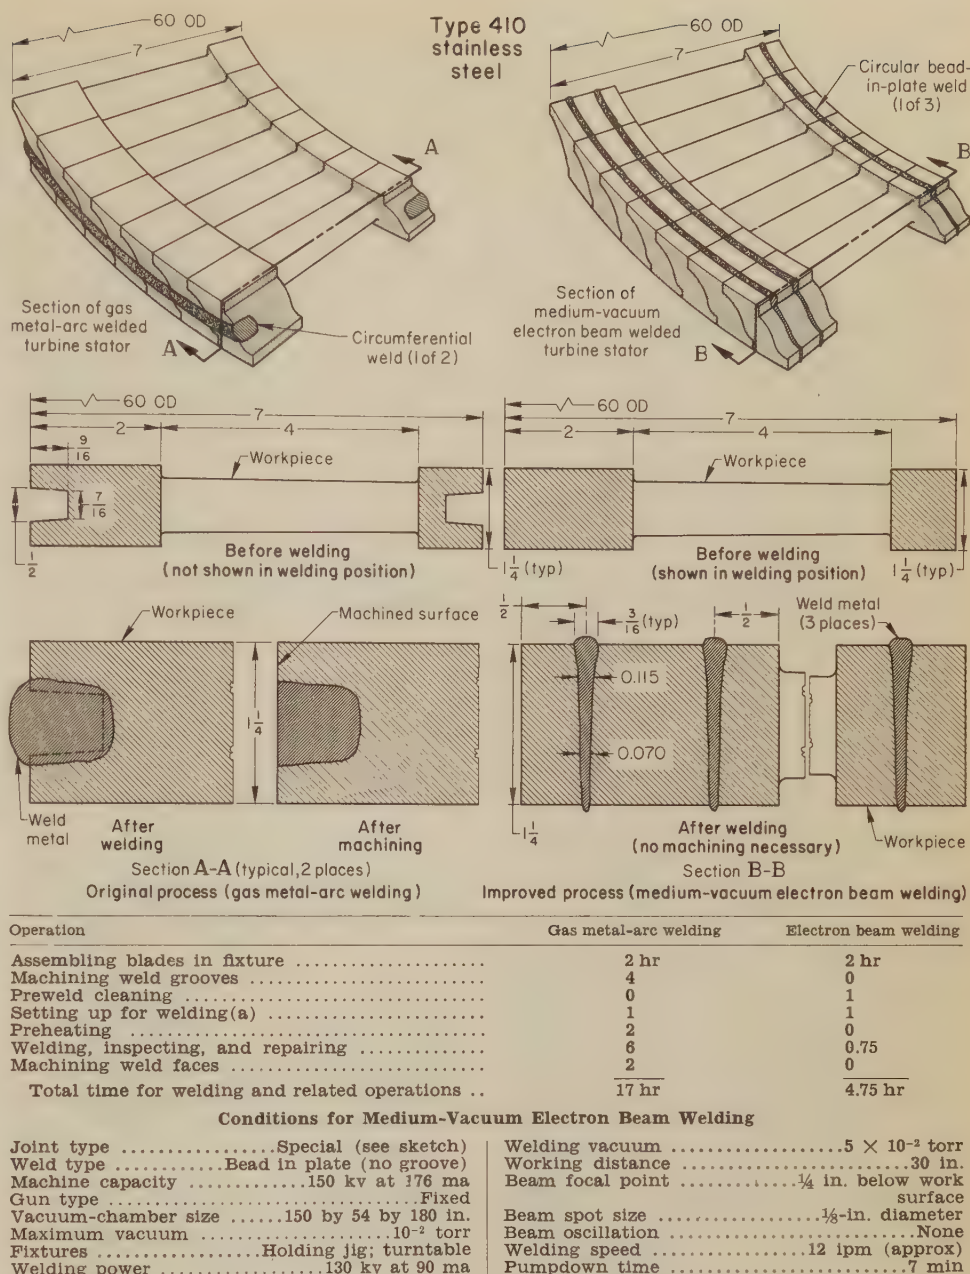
Sections of a turbine diaphragm (stator) for which electron beam welding replaced gas metal-arc welding for joining the blades. Process change eliminated preheating and two machining operations, and reduced welding time. (Example 466)
